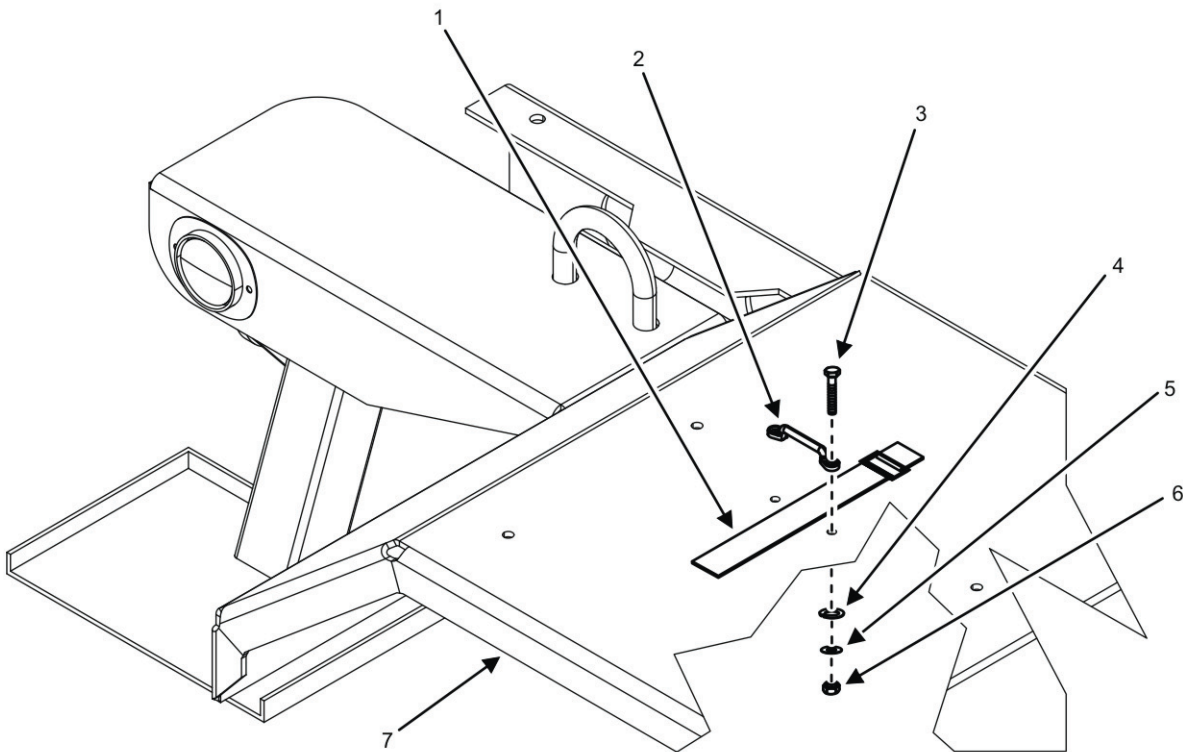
Remove/Install Loop Strap Fastener — Detail.
